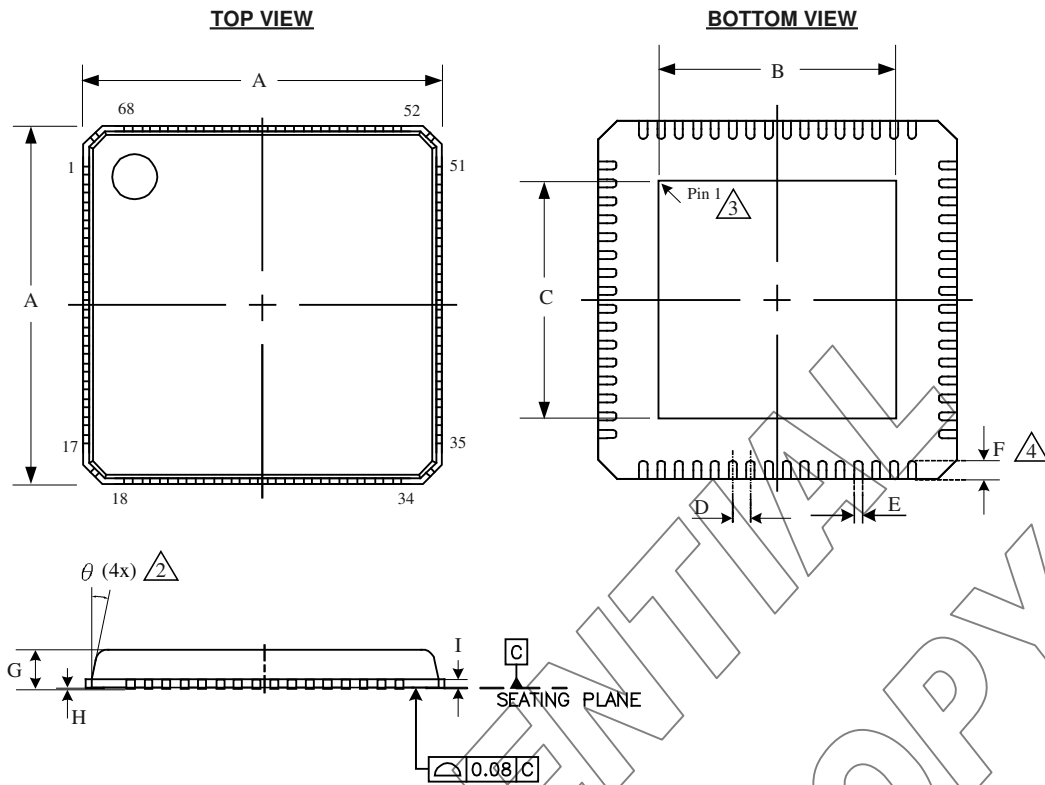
68 Pin QFN Package (8 X 8 mm)
